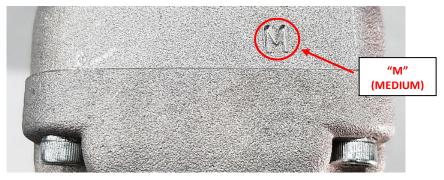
Example of Spring Setting Marking on Top of Nozzle
